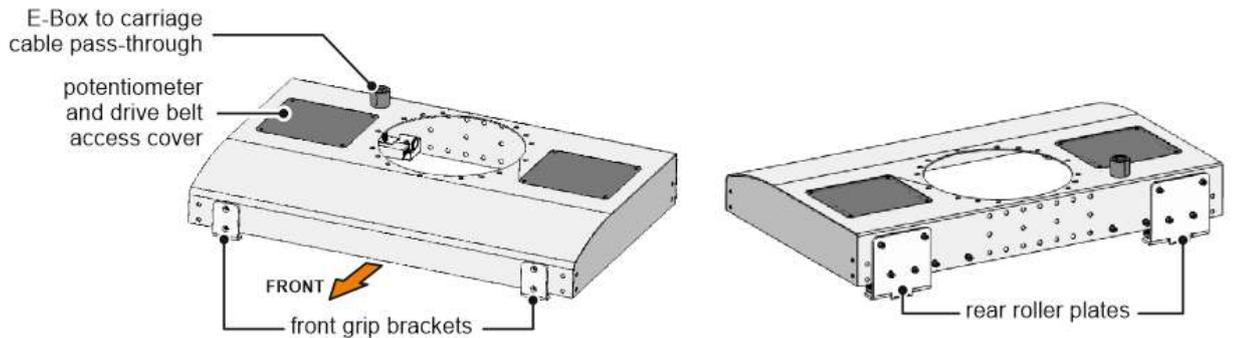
Floor carriage front and rear view (rotating carriage version shown)
